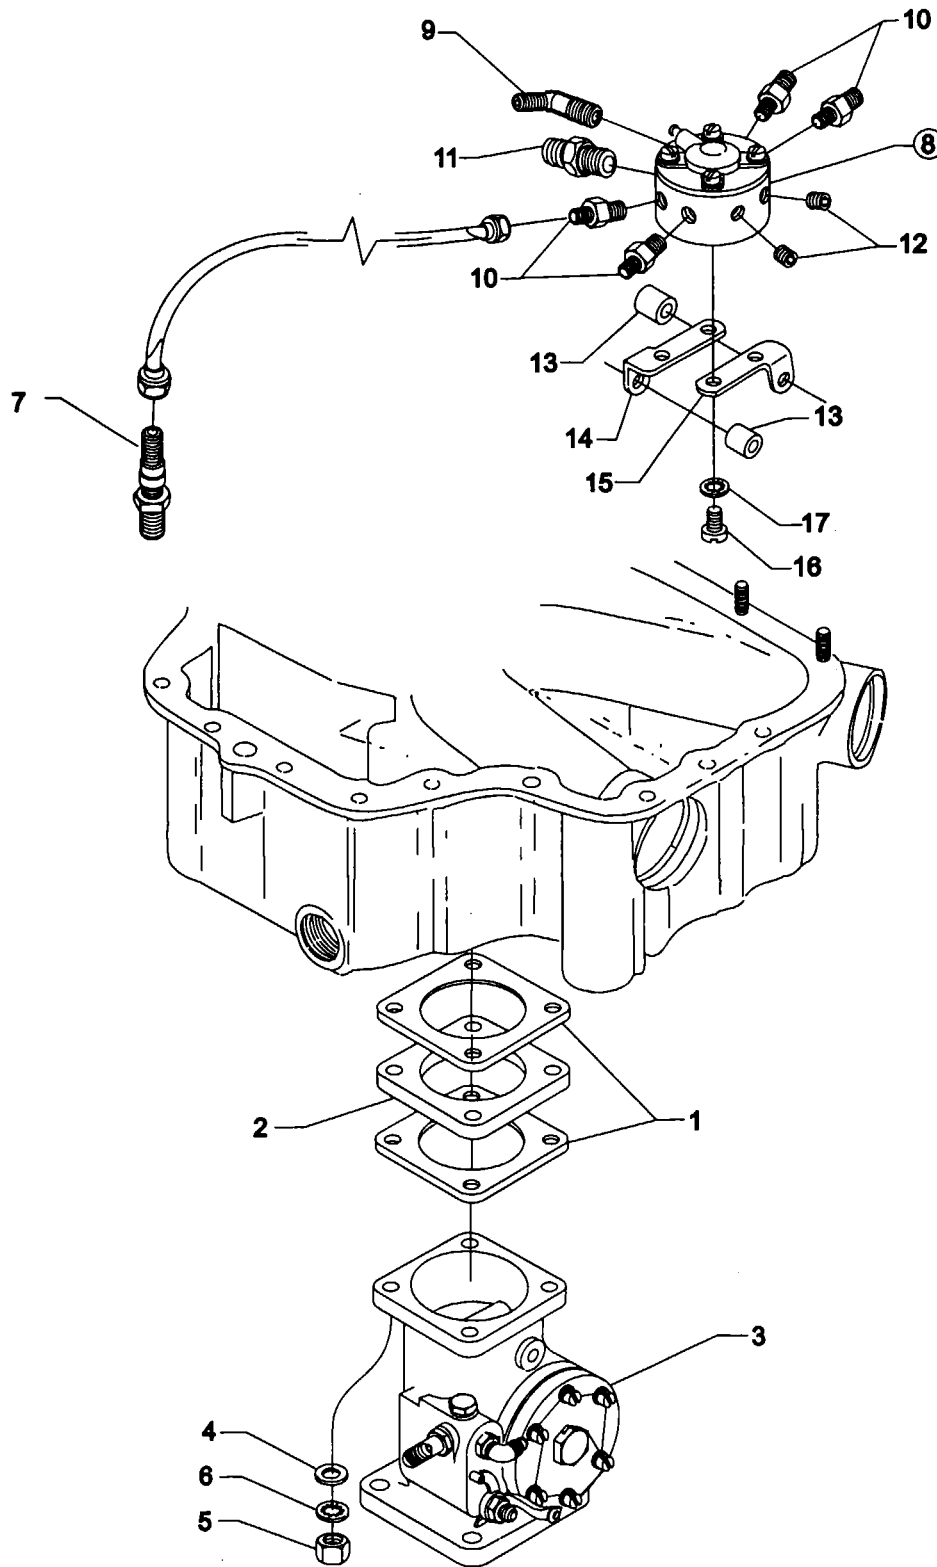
FUEL INJECTOR, FUEL MANIFOLD AND INJECTION NOZZLES
